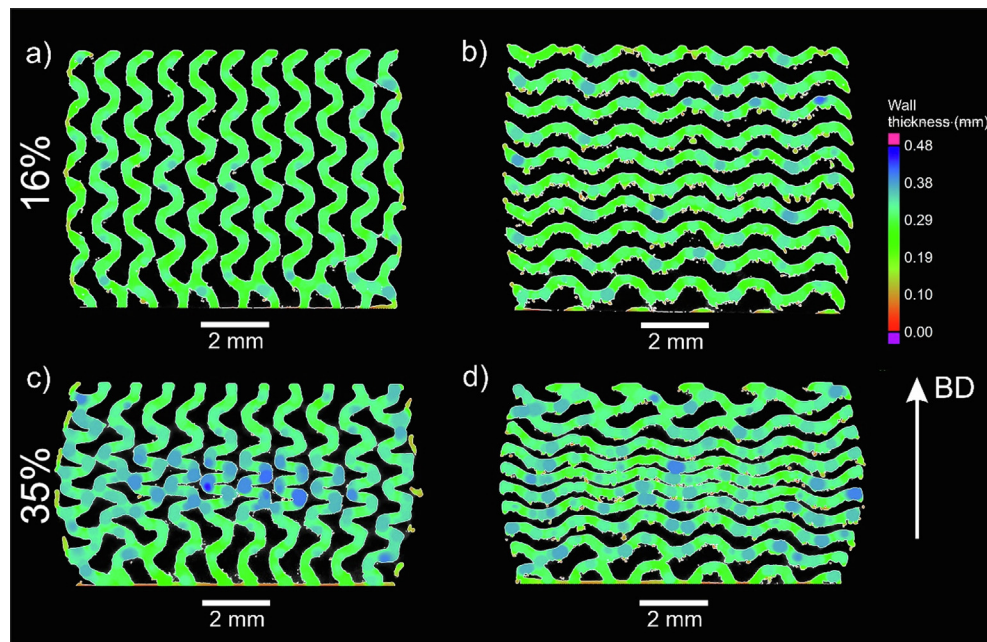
XCT reconstructed cross sections of the pre-strained sample with contour for: (a) vertical walls ~16% pre-strained, (b) horizontal walls ~16% pre-strain; and (c) vertical walls ~35% pre-strained, (d) horizontal walls ~35% pre-strain.
